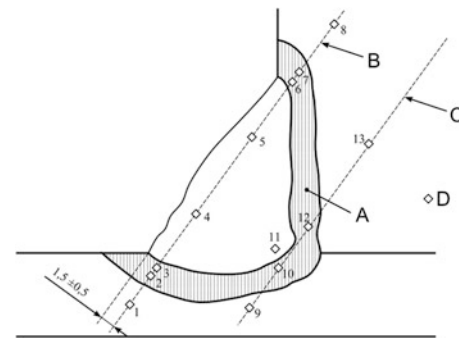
Fillet-weld survey method for Vickers Hardness Measurement (dimensions: mm). (Source: NACE MR0175/ISO15156, Part 2). Key: A weld HAZ (visible after etching). B line of survey. C line of survey, parallel to line B and passing through the fusion boundary between the weld metal and the HAZ at the throat. D hardness impressions: Impressions 3, 6, 10, and 12 should be entirely within the HAZ and located as close as possible to the fusion boundary between the weld metal and the HAZ
